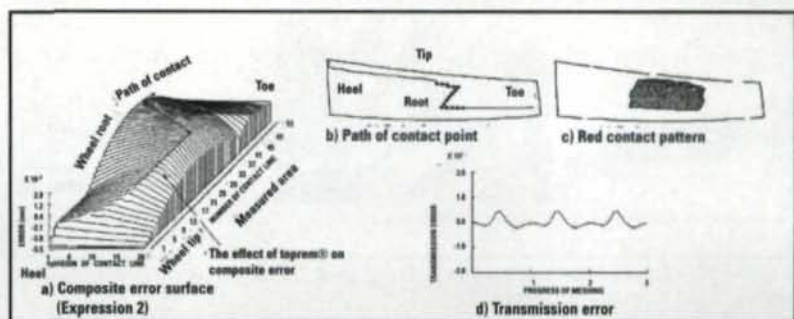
Composite error surface, path of contact point and red contact pattern expressed on the ring gear tooth flank (for gears cut by standard machine setting summary data, and $V=0.00$ mm, $H=0.00$ mm).
